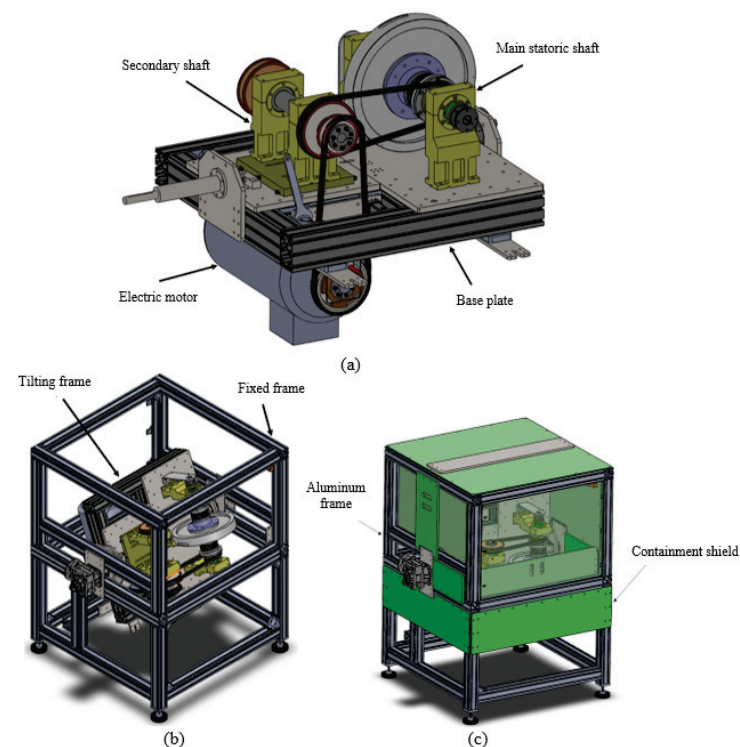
Test rig CAD model overview: (a) tilting base with motor, secondary shaft and main axis; (b) frame definition; and (c) aluminum frame with steel armor.
